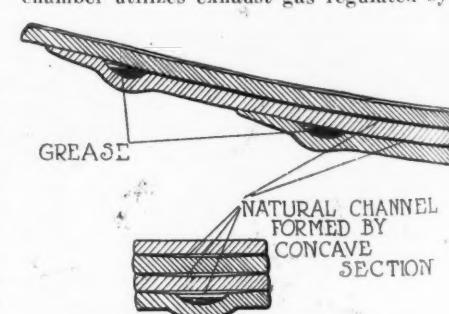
DETROIT SELF-LUBRICATING SPRING CONSTRUCTION
